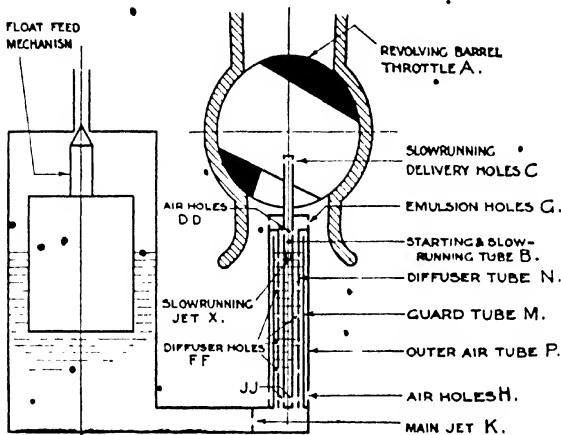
Diagrammatic Arrangement, Claudel Carburettor
